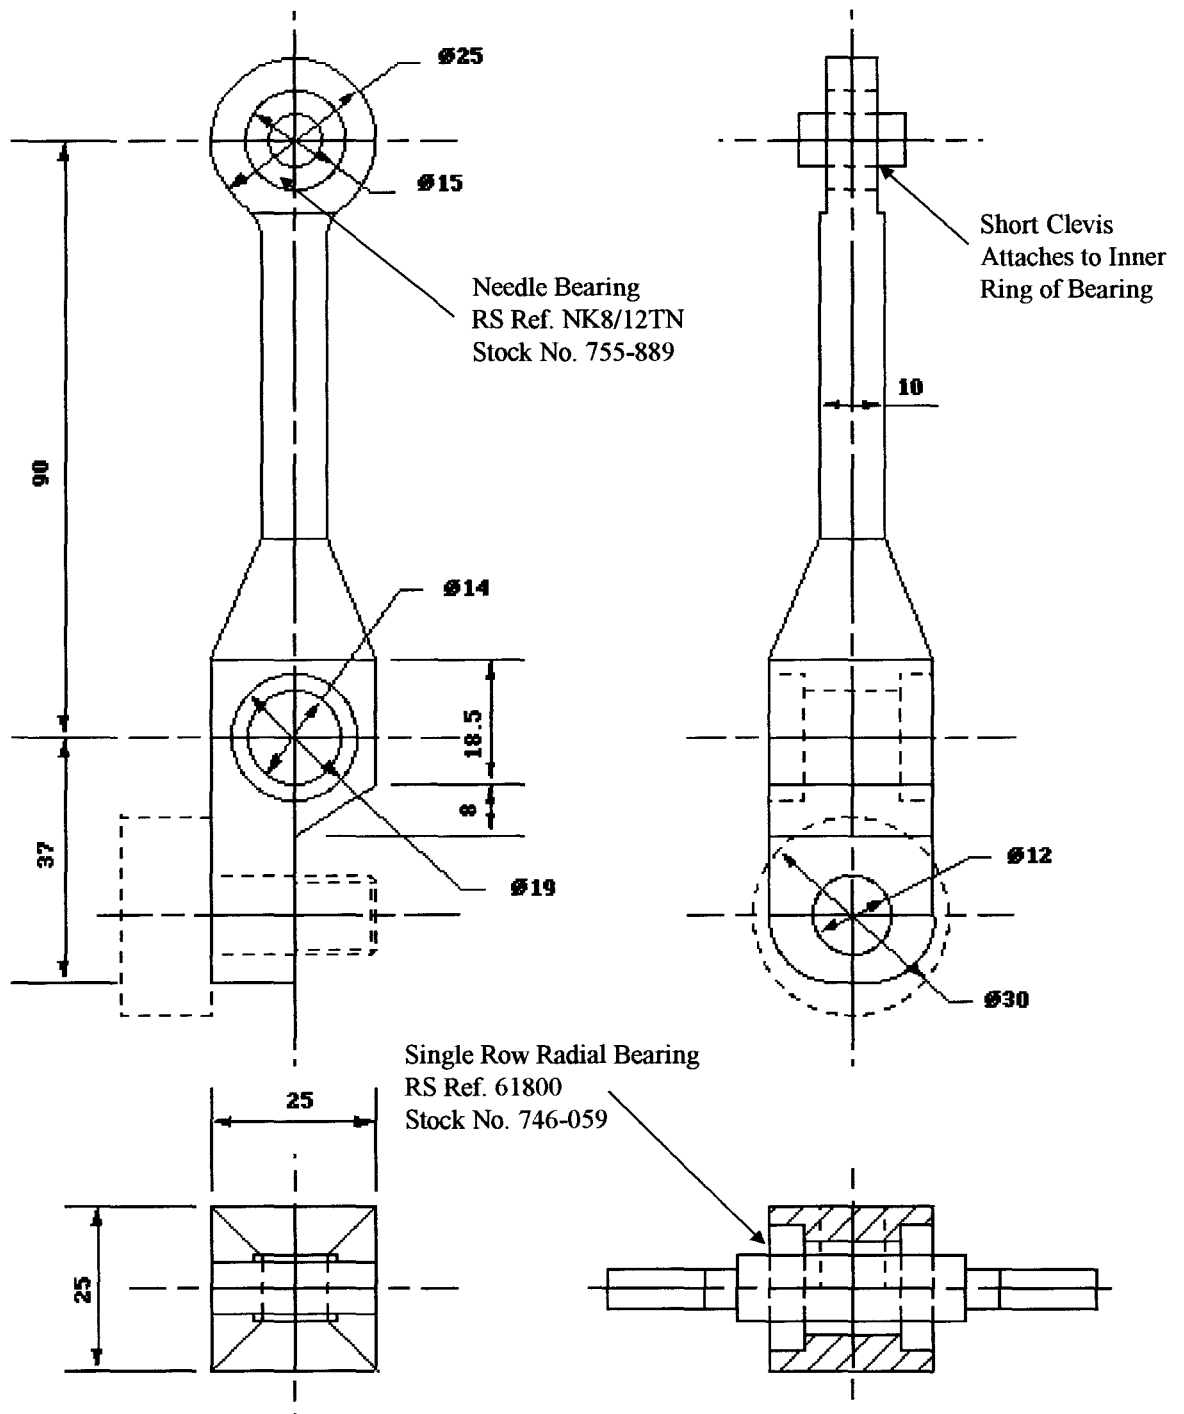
Technical Drawing of Pitch Link (roller in hidden detail).
